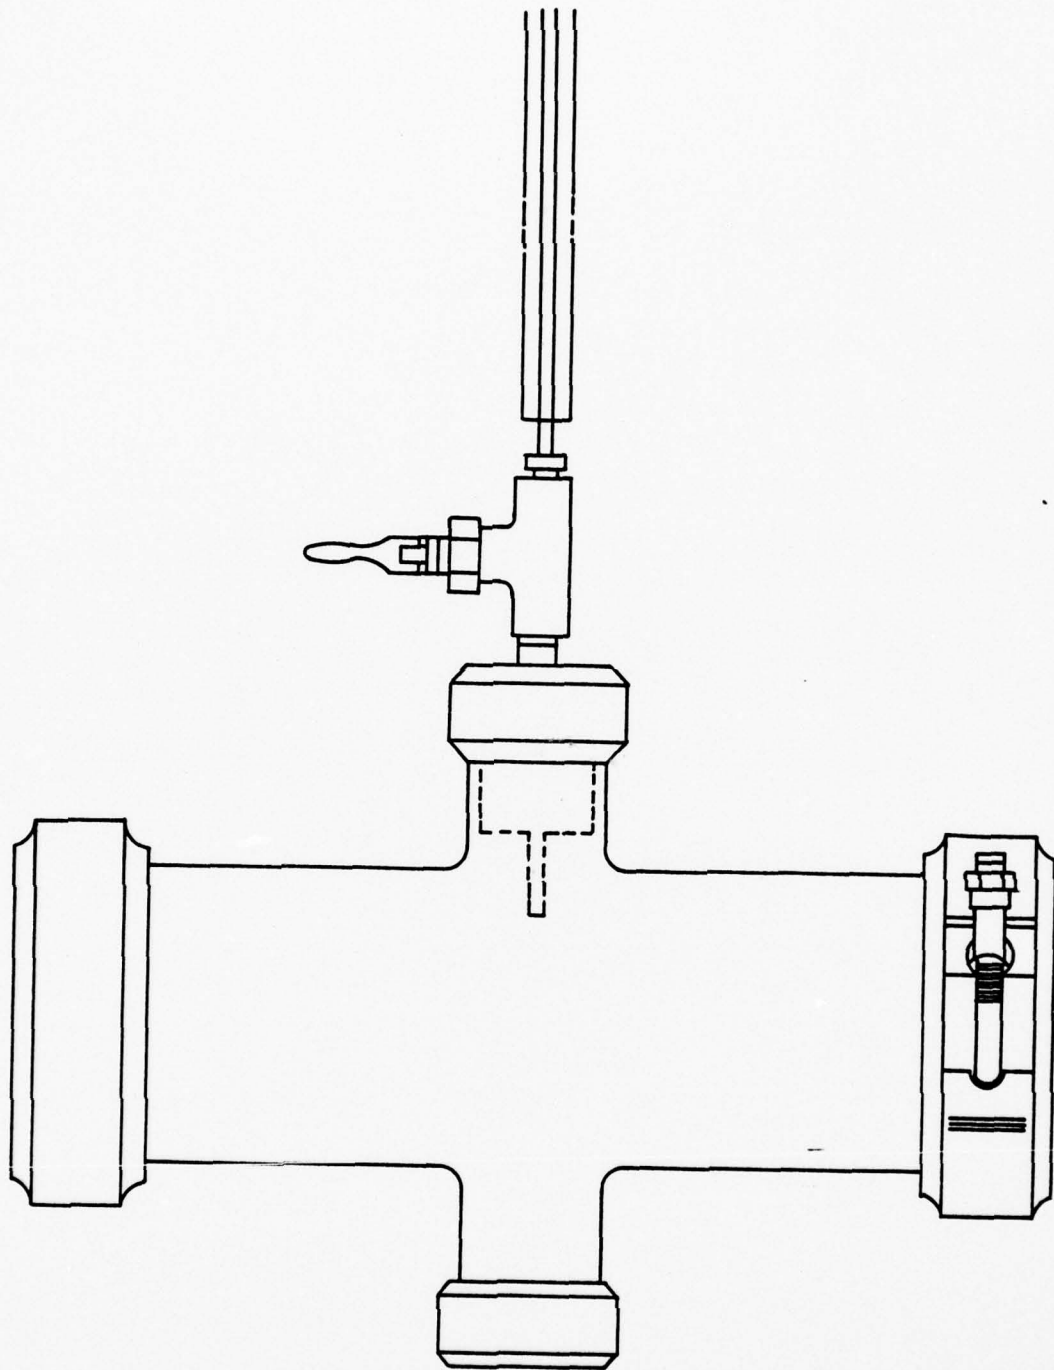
SAMPLE WITHDRAWAL FLAME TUBE MODULE
